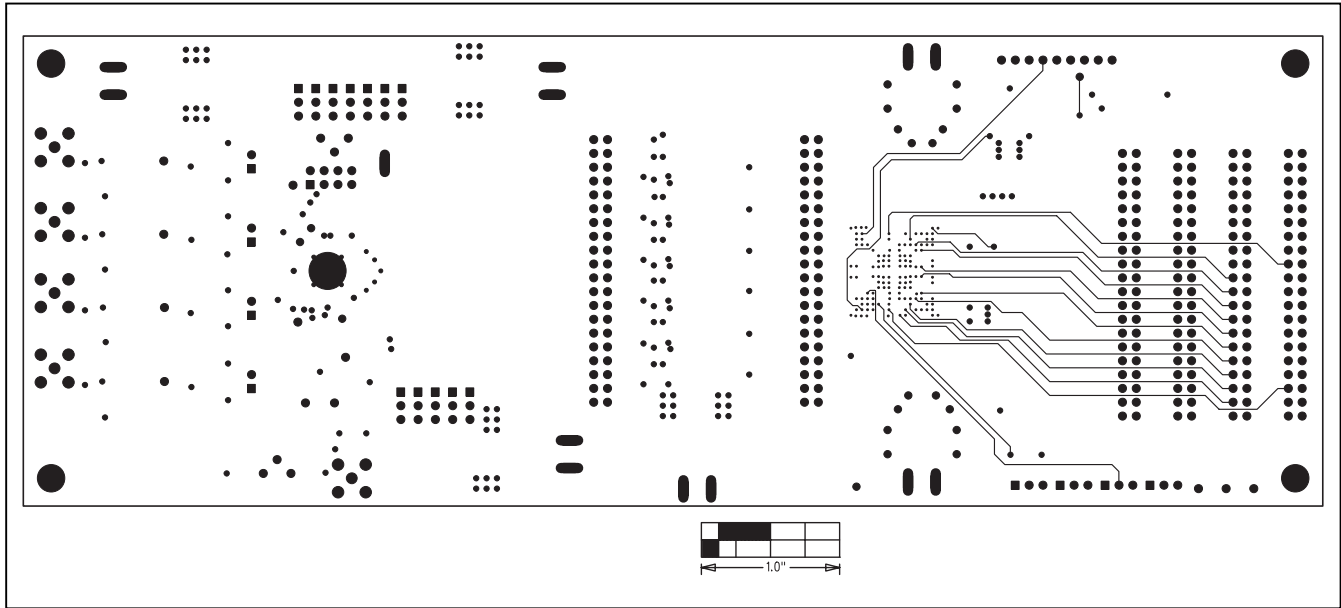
MAX1127 EV Kit PC Board Layout (Inner Layer 4)—Signal Layer
